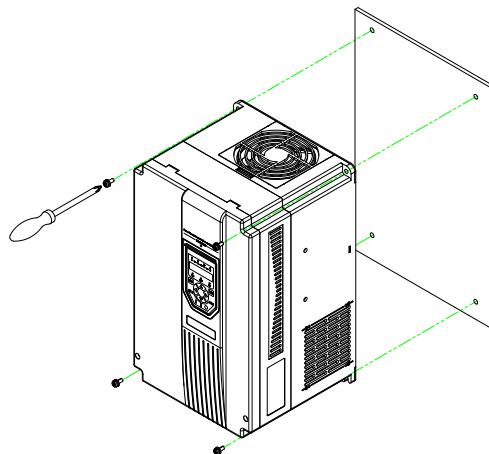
Wall-mounted Type Hope530PM0.75T4~Hope530PM37T4 Models
